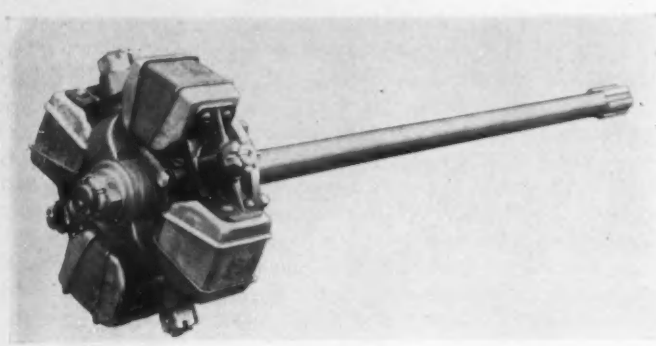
RUBBER TORQUE-INSULATOR FOR USE IN A DRIVING LINE
